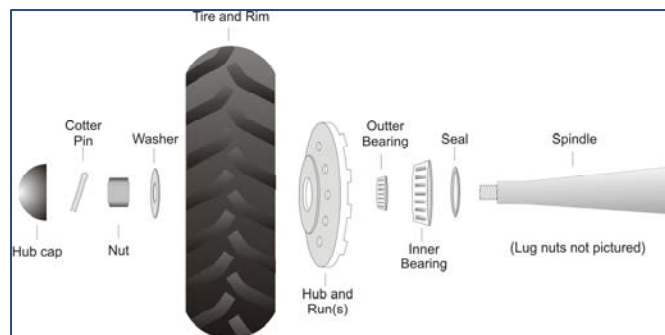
Exploded diagram of airblast sprayer wheel assembly
